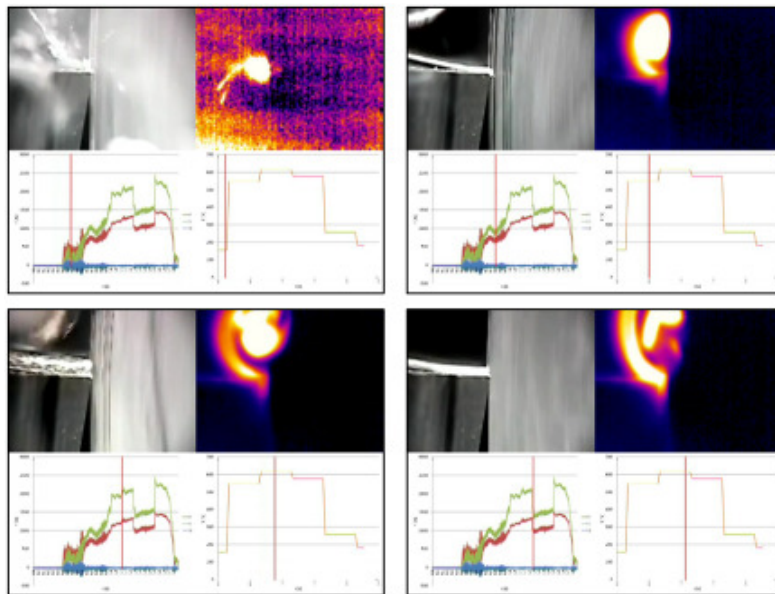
Selected frames from video output of the multifunction measuring system (continuous cutting; $v_c=70\text{m}\cdot\text{min}^{-1}$; $f=0,21\text{mm}$; $a_p=6\text{mm}$; machine: universal lathe SUI-40; cutting tool: holder STFCL 2525M, insert TCMW 16-160700)
